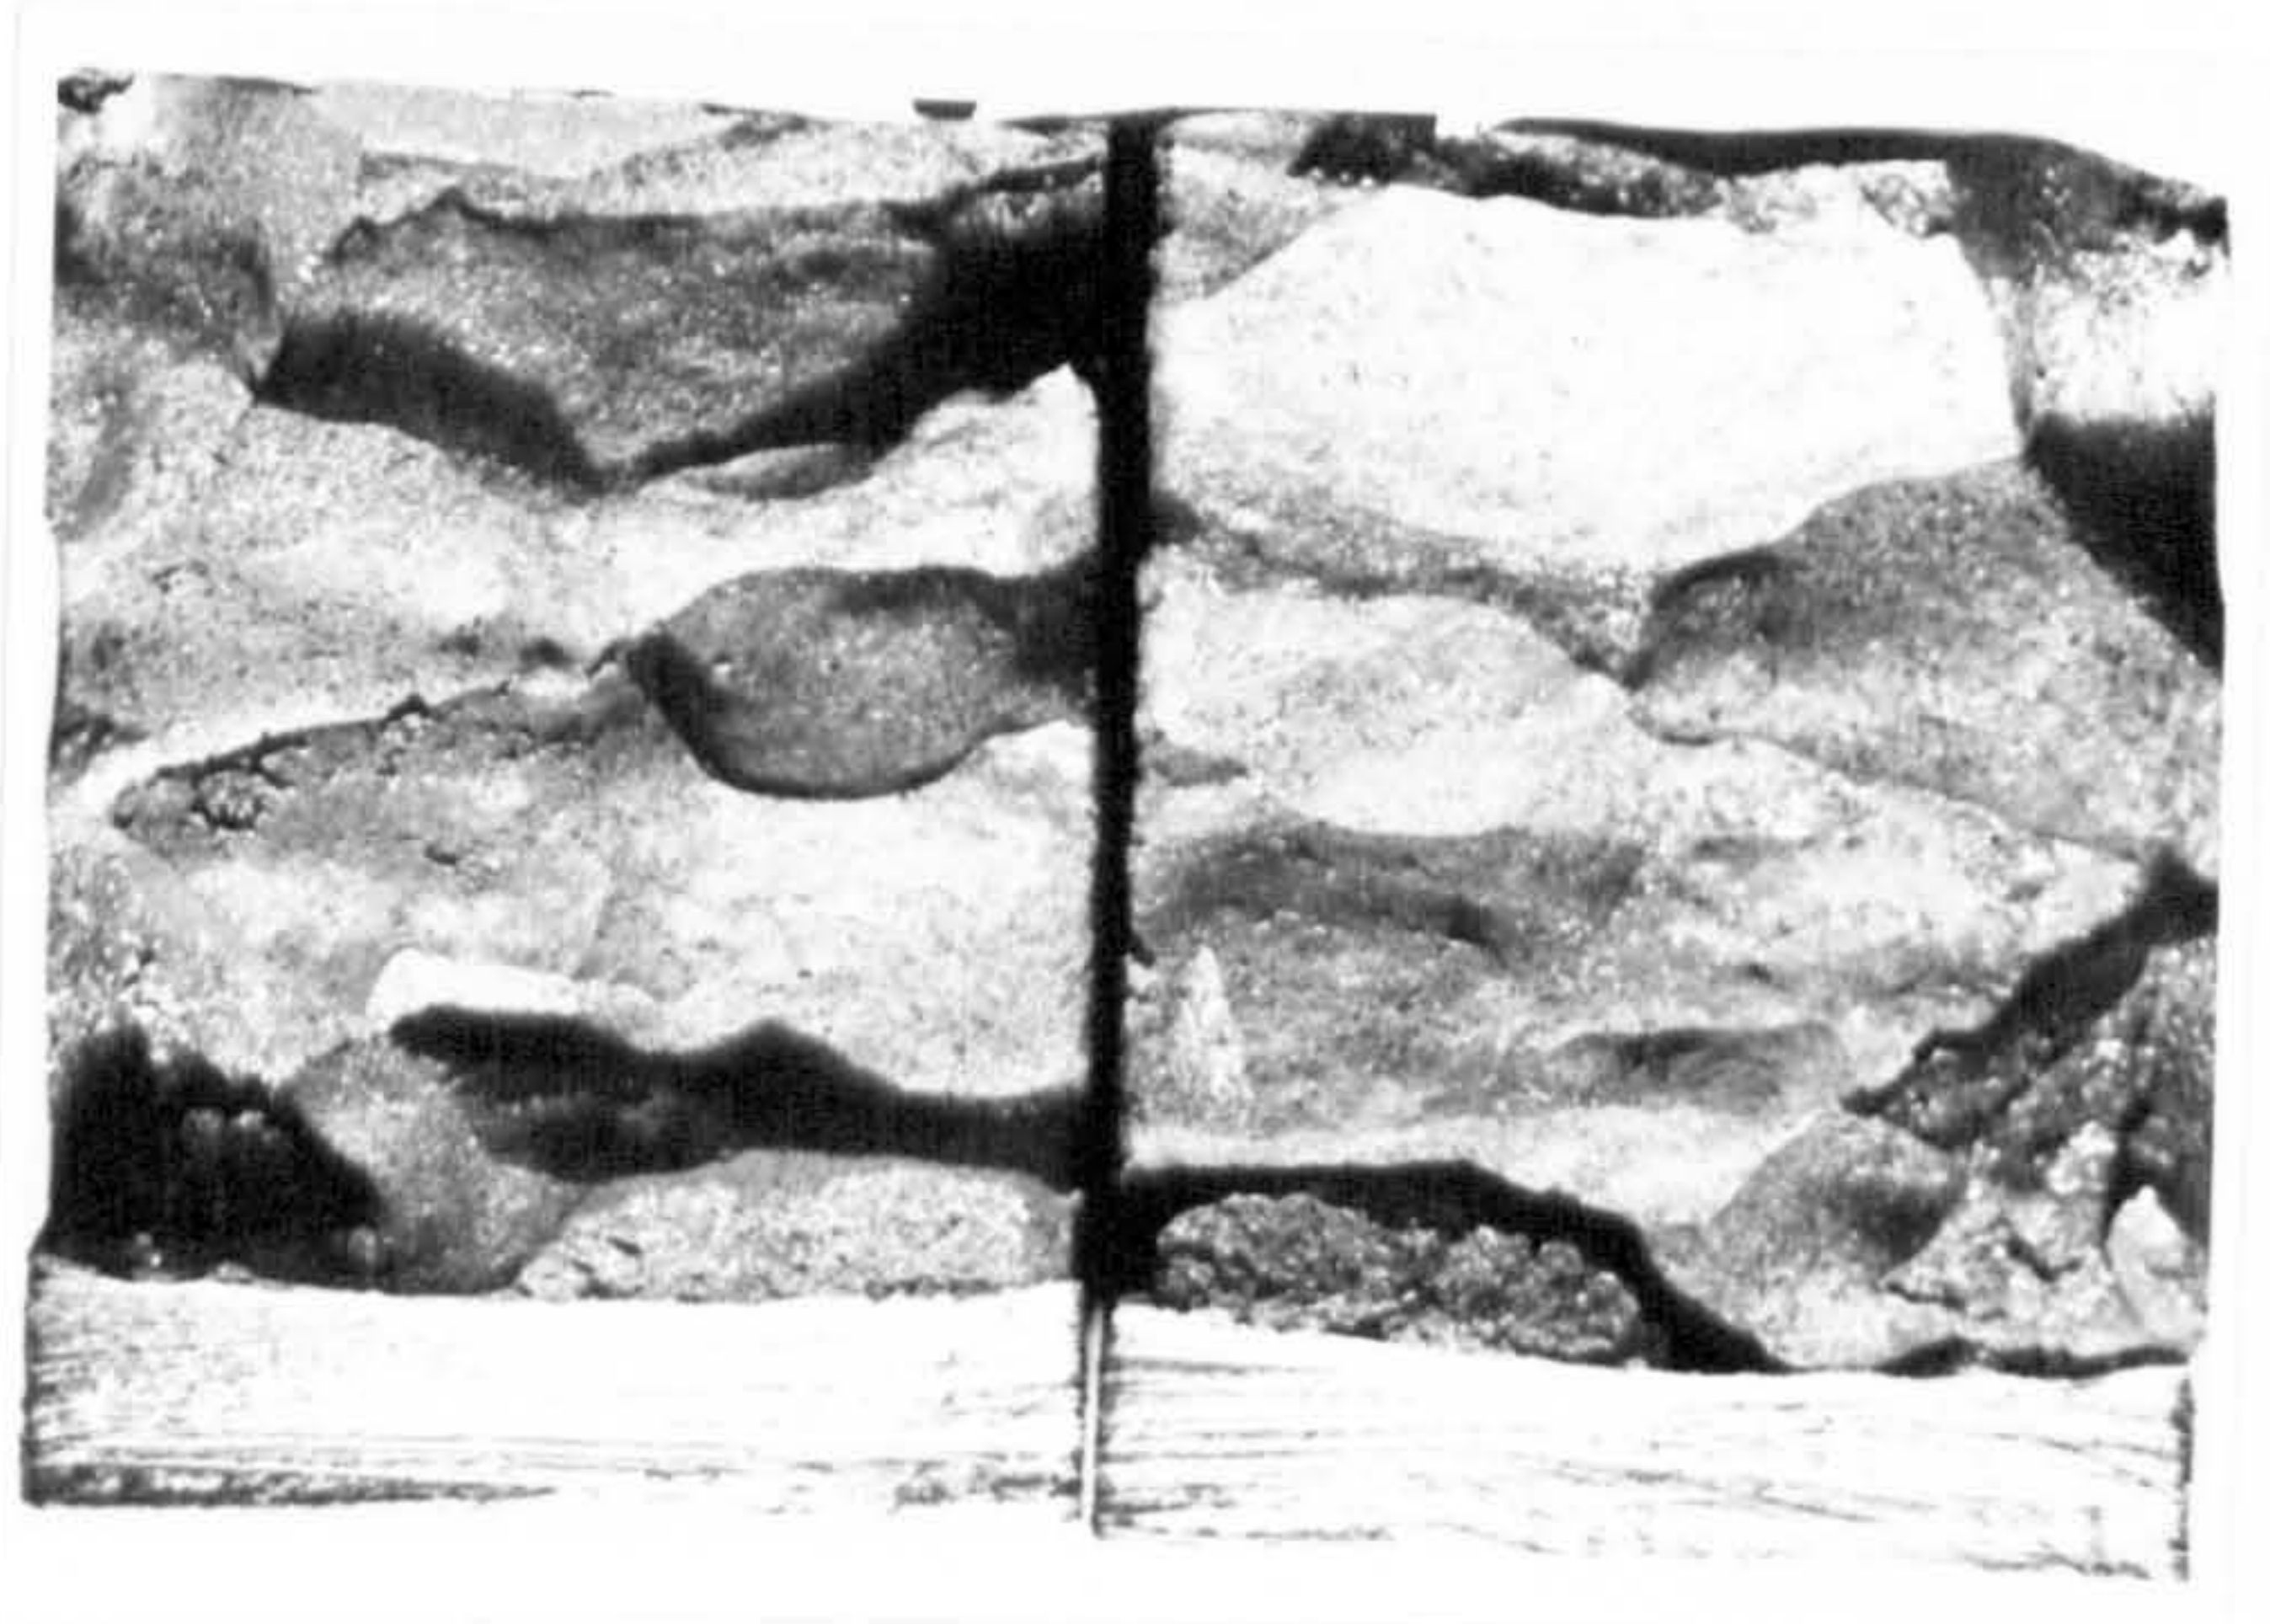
Macroscopic view of the freshly fractured surface, broken by slow three-point bending.
